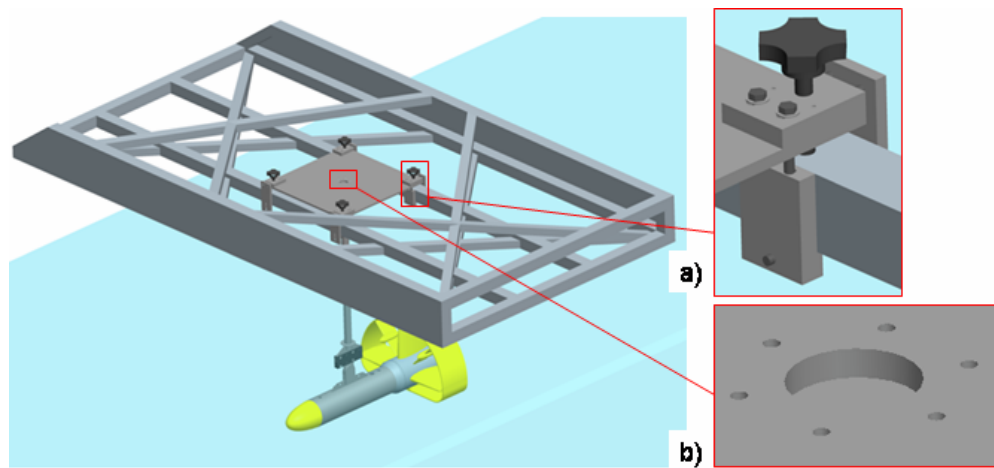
Tow Carriage Apparatus (TCA) mounted to the UNH tow carriage and towfish testing setup a) Clamping mechanism. b) Bolt circle and locating hole.
